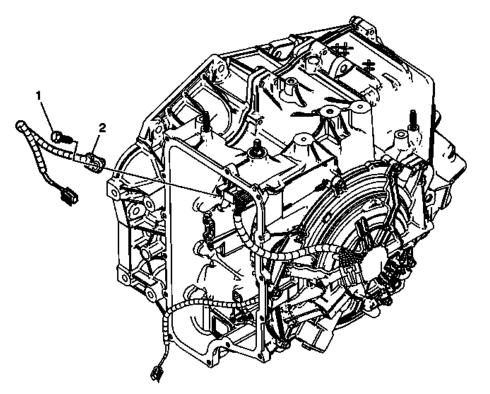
Identifying Electrical Connectors Courtesy of GENERAL MOTORS COMPANY
